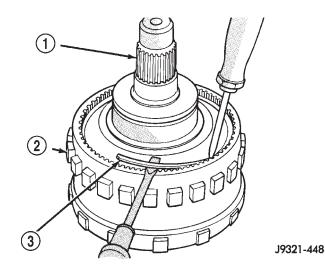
Marking Annulus Gear And Output Shaft For Assembly Alignment
